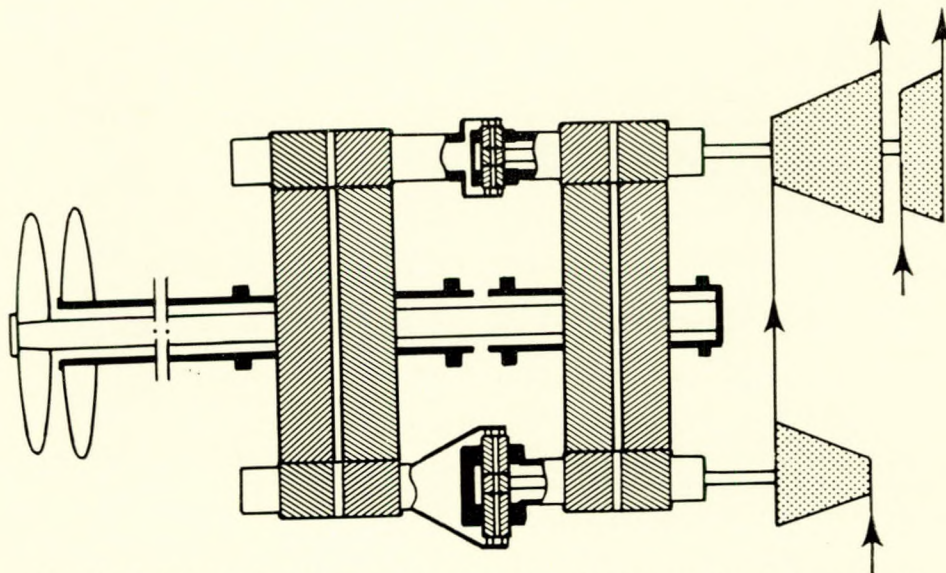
Principle of contra-rotating gear with epicyclic gears in the first reduction
